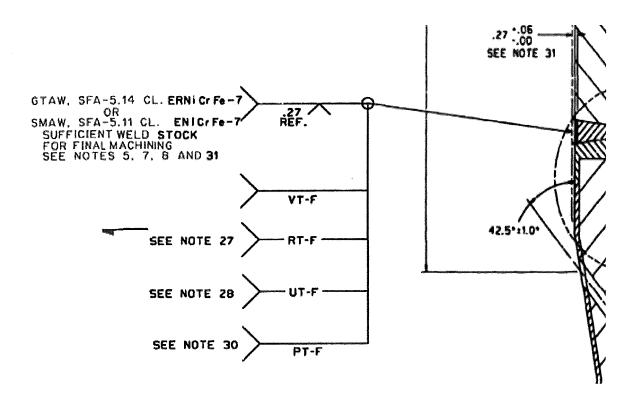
Excerpt from Westinghouse Drawing 6147E62 Weld Detail
